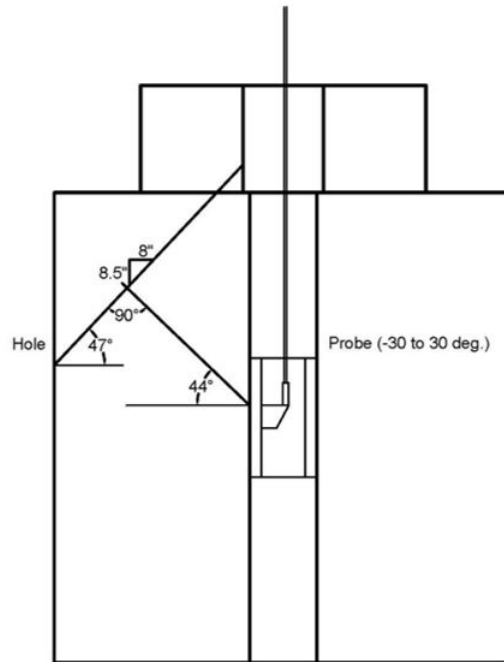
Diagonal grease hole inspection with required angle using the mock-up pin dimensions.
